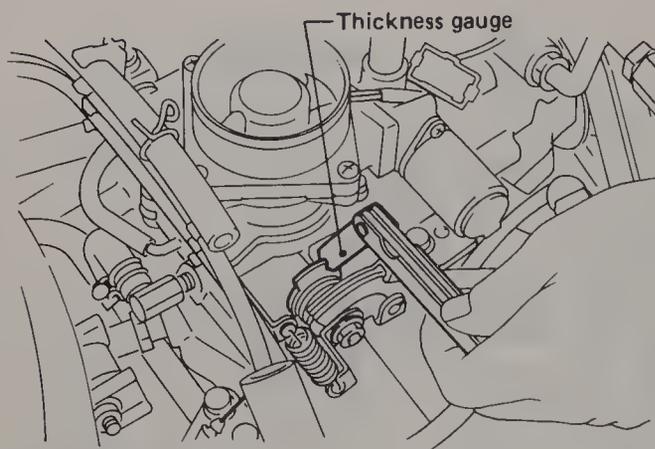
Checking the throttle sensor operation with a feeler gauge and ohmmeter or test light (SPFI) (Sec 8)
